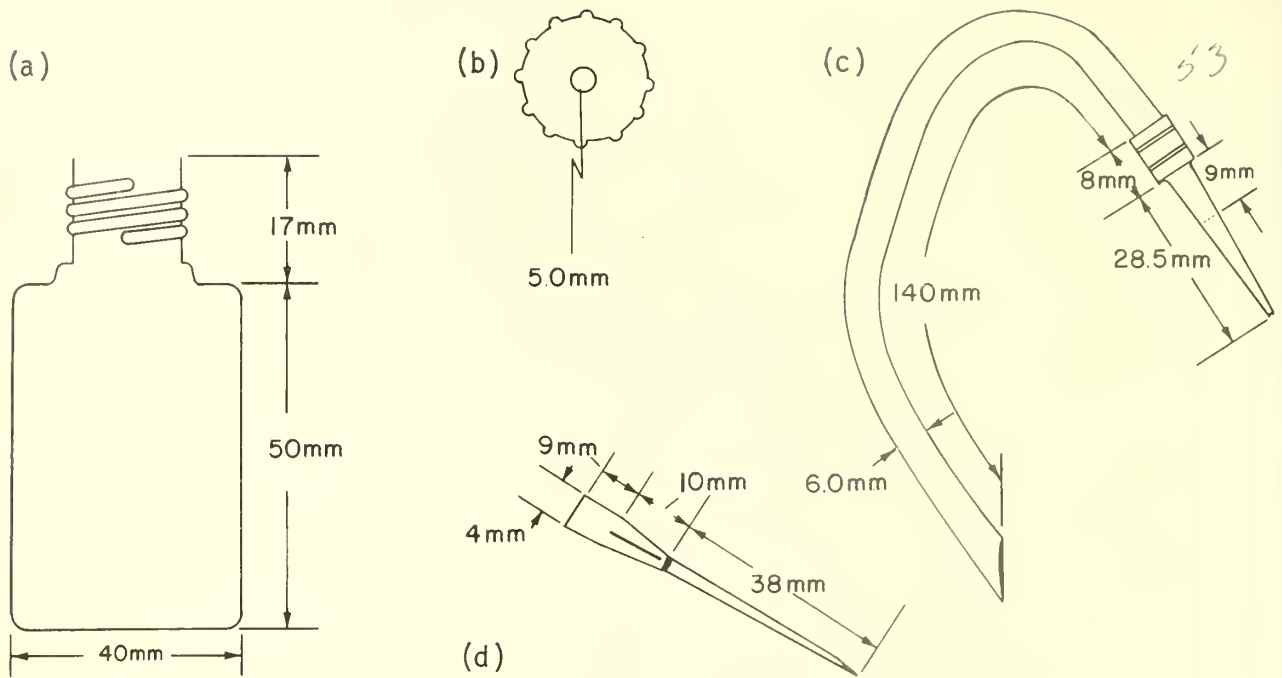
Scale drawing of components of the improved pollinator: (a) polyethylene squeeze wash bottle; (b) bottle cap with top opening 1 mm smaller than hose; (c) hose and nozzle; and (d) disposable hypodermic needle.
